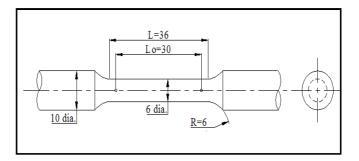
Specimen geometry and dimensions for tensile according to ASTM E8M (all dimensions in mm).
